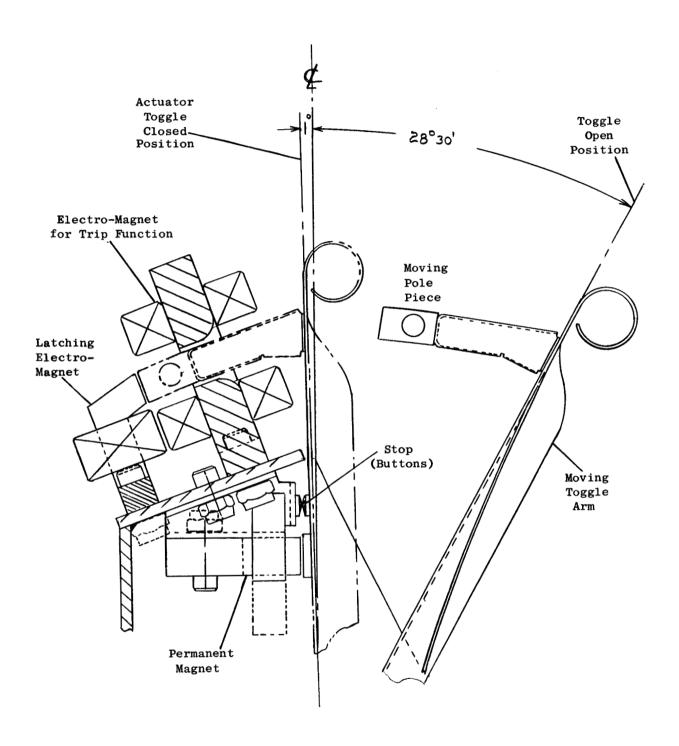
Actuator, with Latch and Trip Mechanism, Shown in Closed and Open Position.
